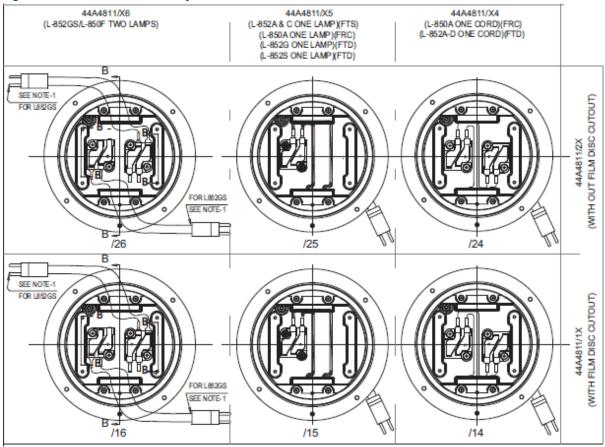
Inner Pan Subassembly 44A4811/X4-X6
